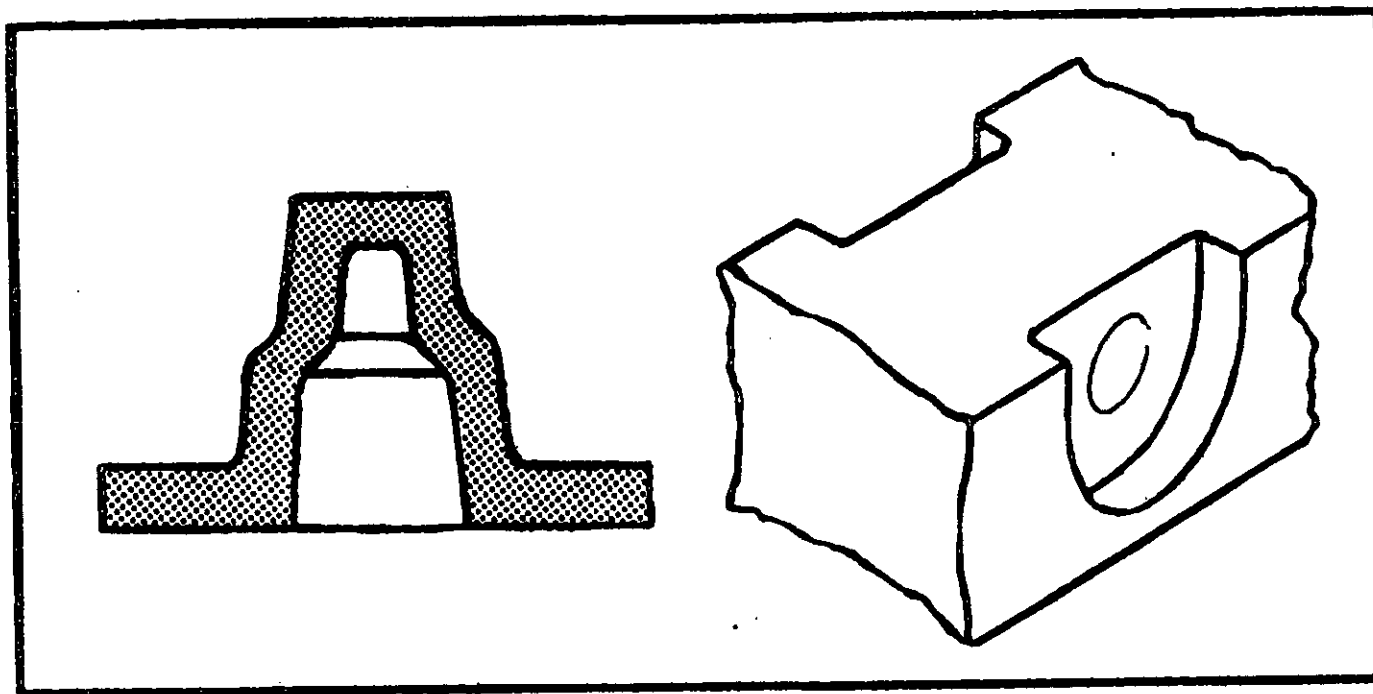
Stepping and notching techniques for increasing hole depth in molded parts.
